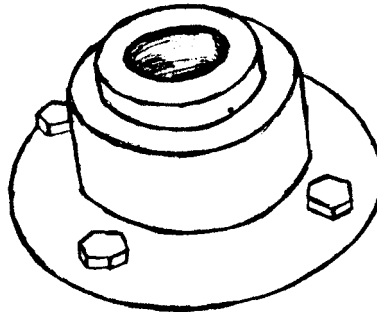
Flange block with roller bearings to fit over axle. Example shown: Link belt FB22428H flange block.
